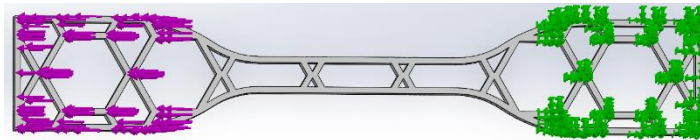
Fixed geometry and remote load for the simulation of the tensile test.
